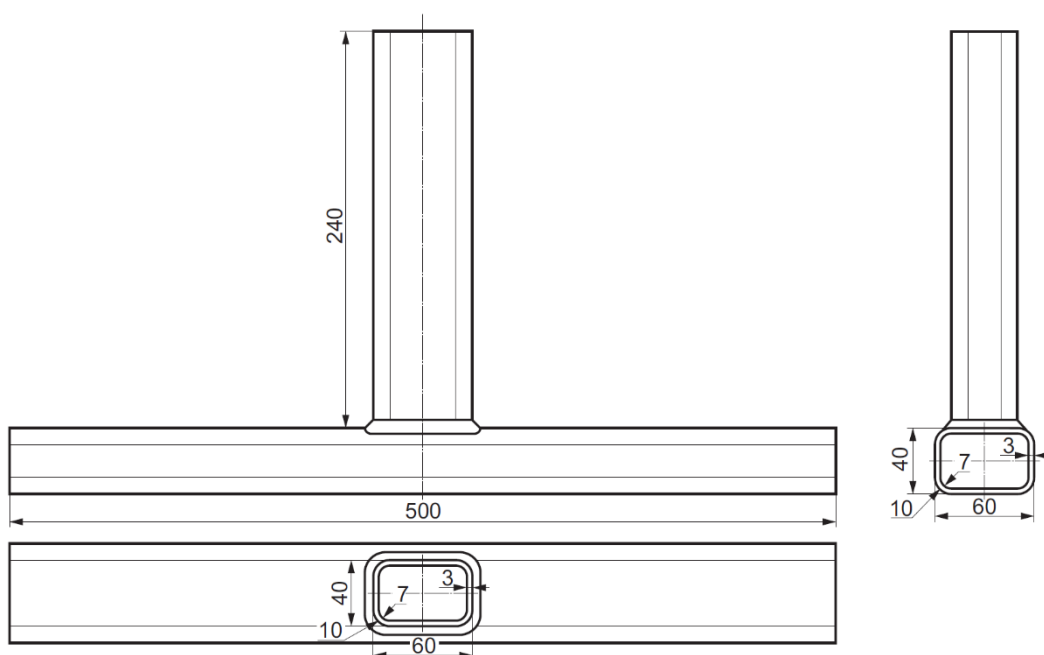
Drawing of the T-joint from Mann [31] used for *FEMFAT Weld* validation
